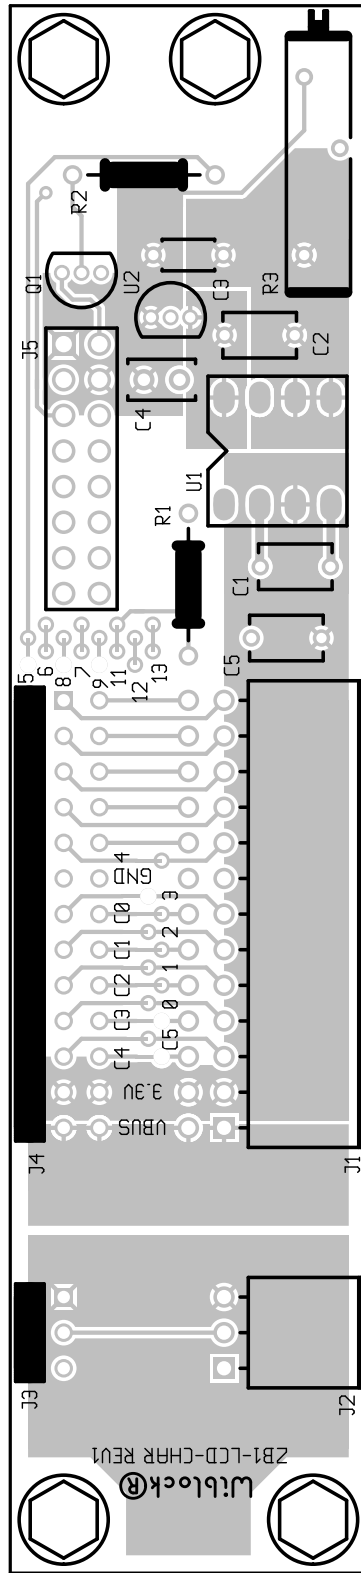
ZB1-LCD-CHAR Top Side Assembly Drawing (Rev 1)
